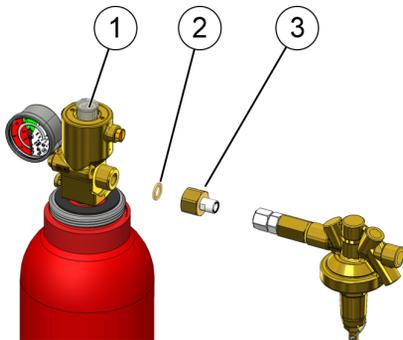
Assembled “adapter connection DN8” on to the pressure reducer
